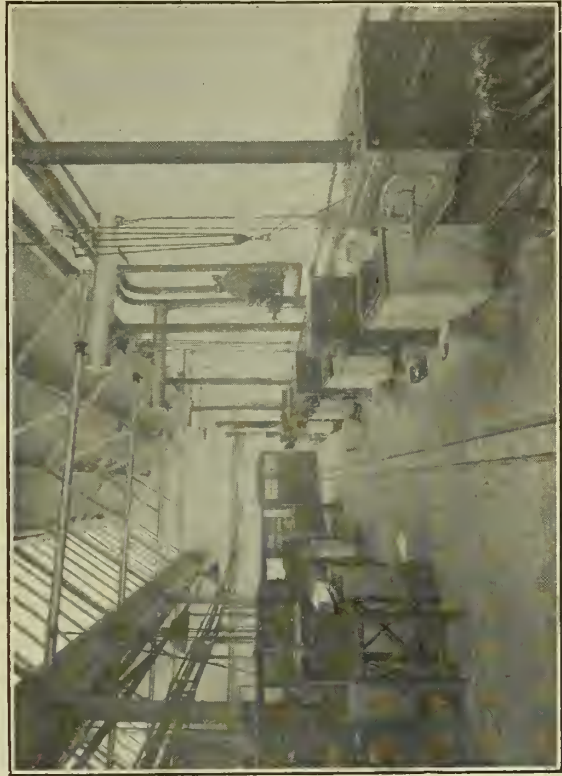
SUITE OF TOOL-HARDENING FURNACES.
